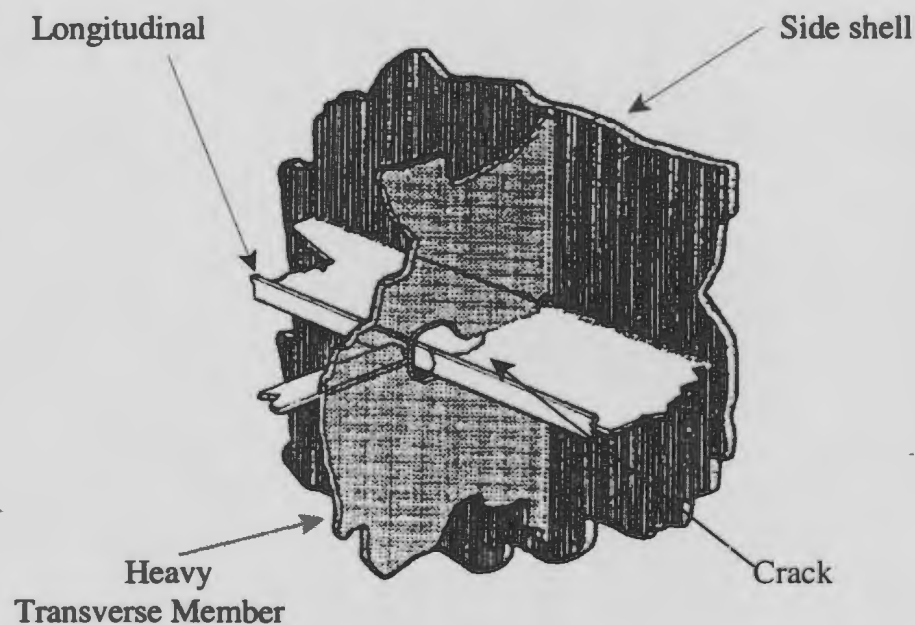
Crack in the Connection between the Longitudinal and the Heavy Transverse Member
